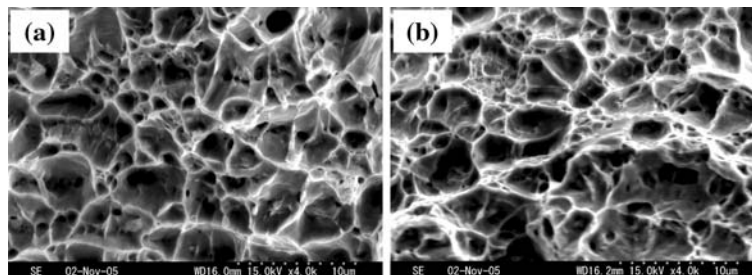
Ductile fracture on tensile specimens (a) 590 and (b) 780 steels
